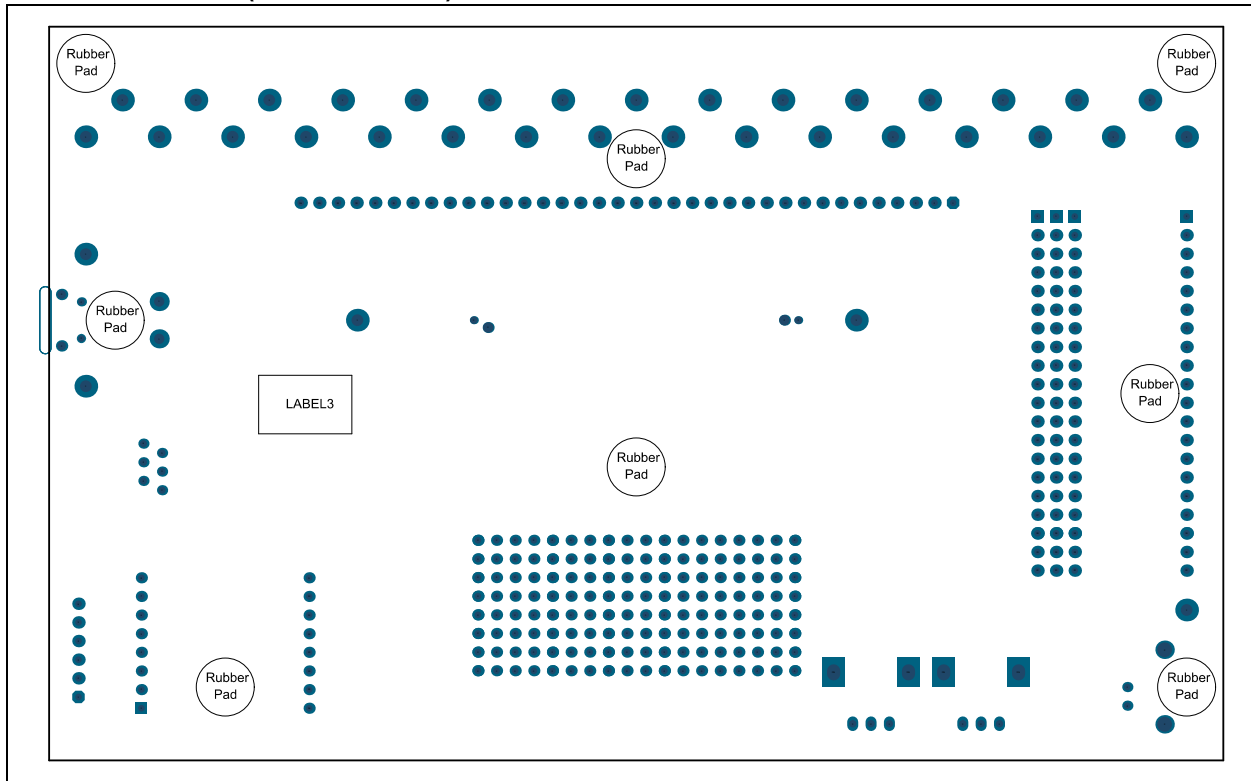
DIGITAL POWER DEVELOPMENT BOARD BOTTOM ASSEMBLY (BOTTOM VIEW)
